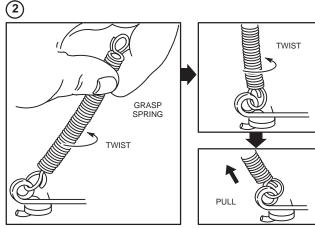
REMOVE SPRING FROM EYELET IN LINK
